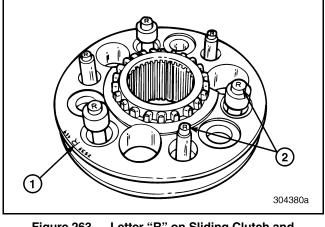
Letter "R" on Sliding Clutch and Synchronizer Pins
